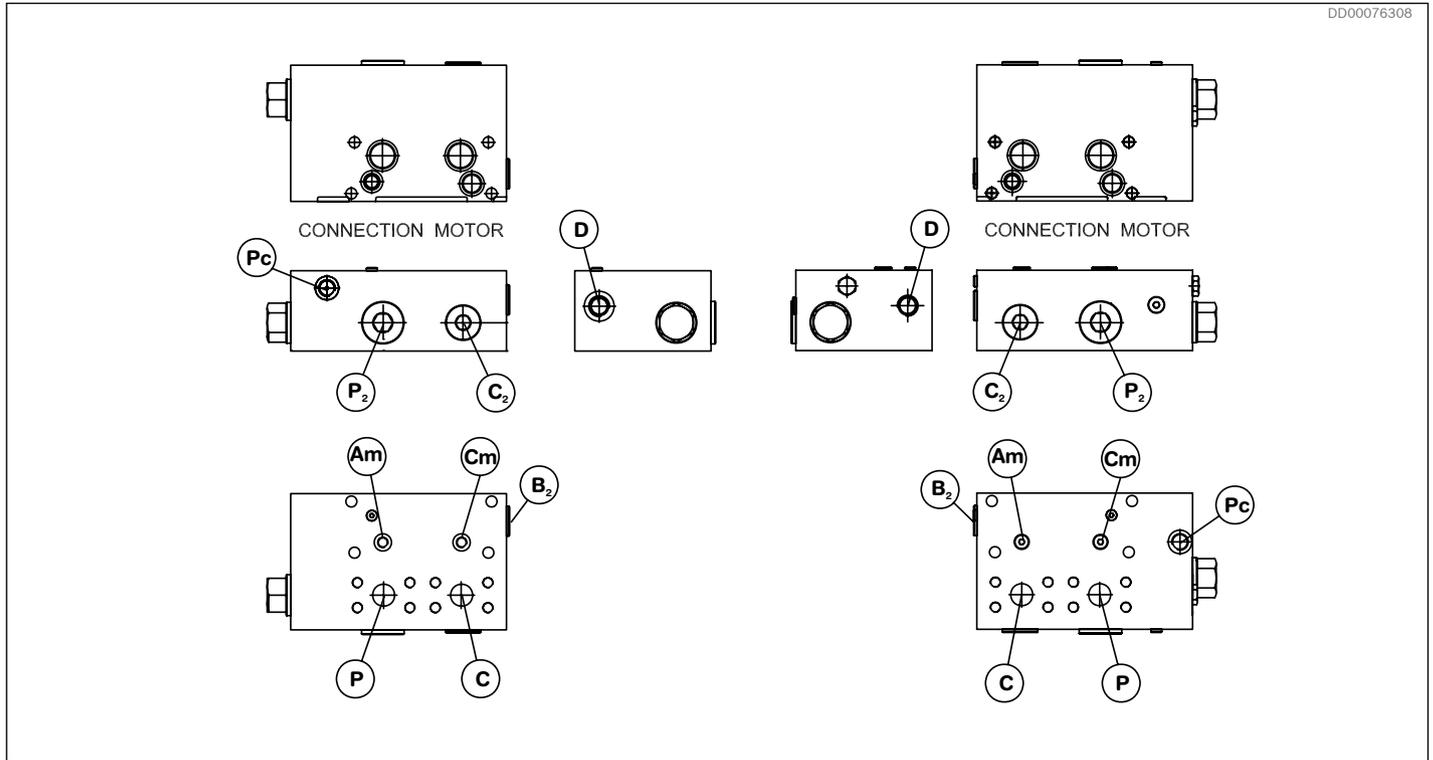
Installation drawing – VTCA 600 0 H, VTCA 600 0 H S-index 05
